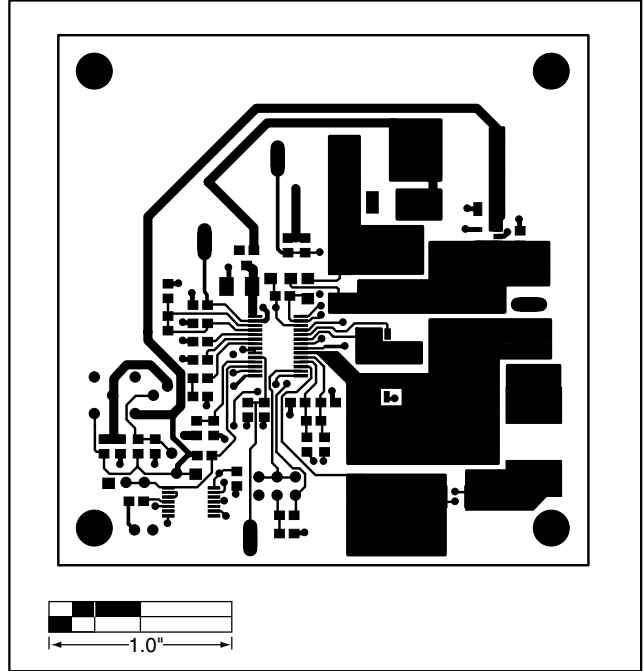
MAX1772 EV Kit PC Board Layout—Component Side
